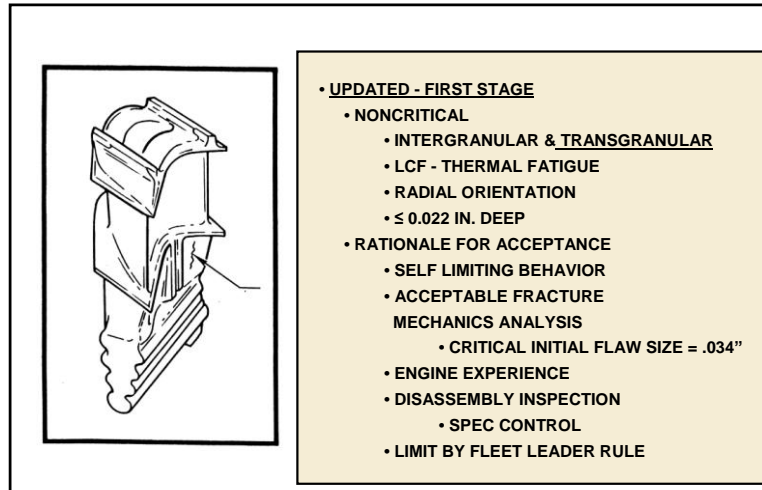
LOX Pump Turbine Blade Low Cycle Fatigue Problem
